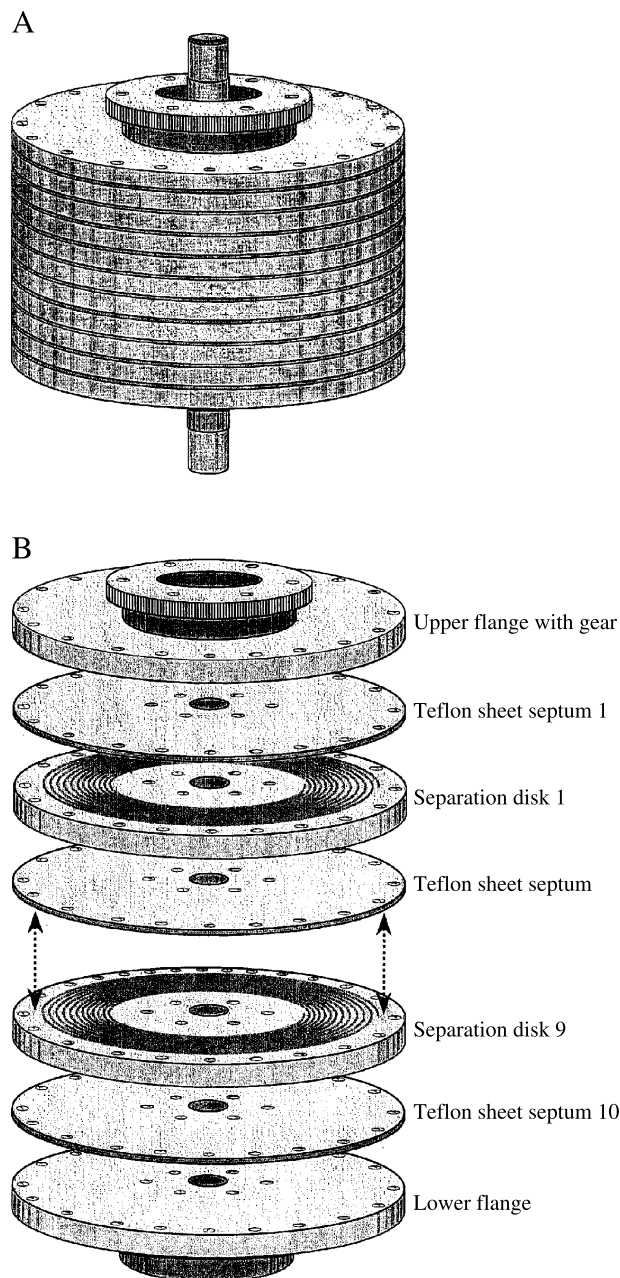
Schematic illustration of the spiral disk assembly. A. Whole view, B. Exploded view showing each component.
